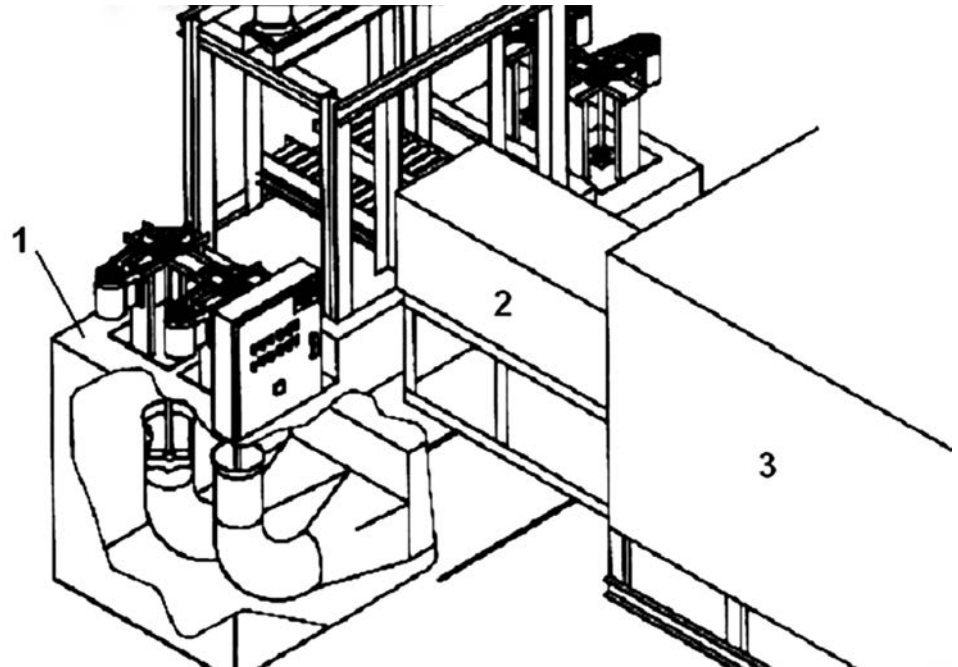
Schematic of production stand-alone 6,000-gallon IQ system. 1-water quench tank equipped with propellers; 2-load charge car; 3-radiant tube
